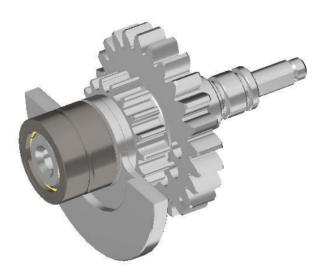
ASSEMBLY OF BALANCER SHAFT
